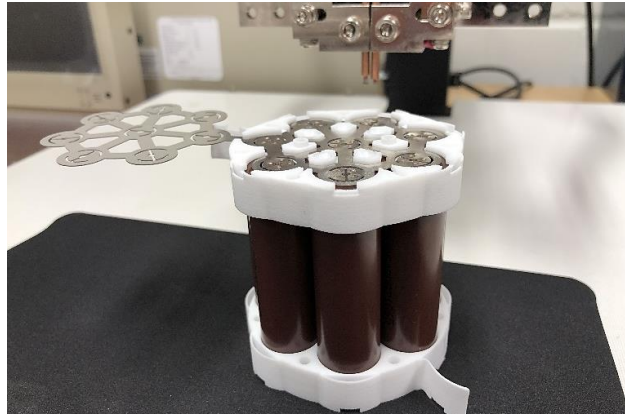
One module of the TES after the resistance spot welding process.
